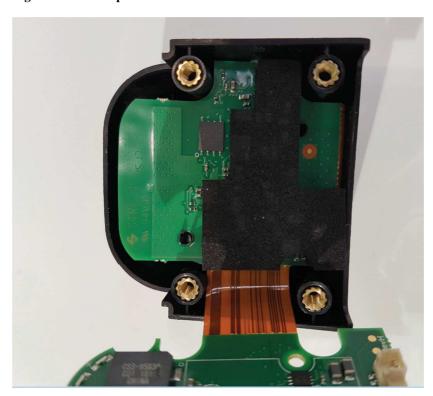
Close up view of Radio Module and flexible PCB with Plastic housing
